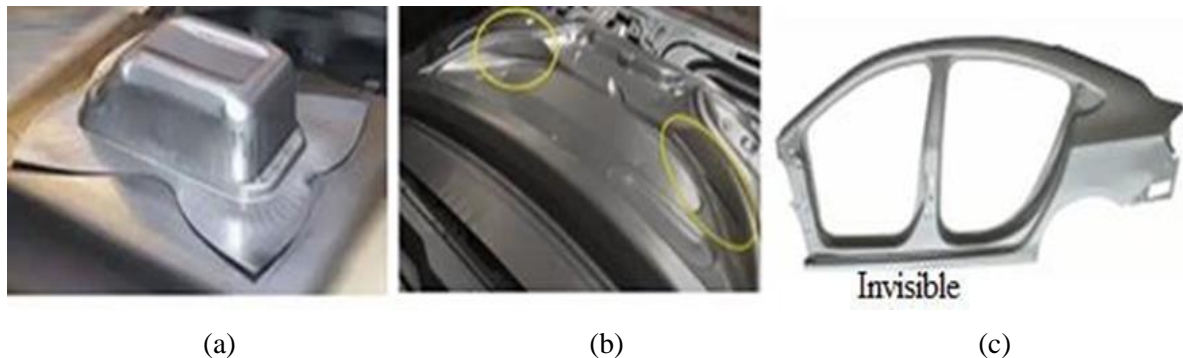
Different technical challenges in sheet metal stamping process: (a) wrinkles; (b) splits; (c) springback
